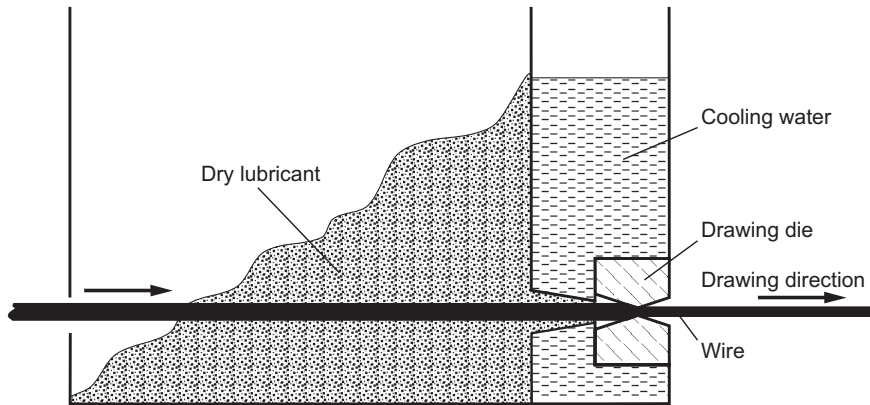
Dry drawing using a drawing box with die cooling.
